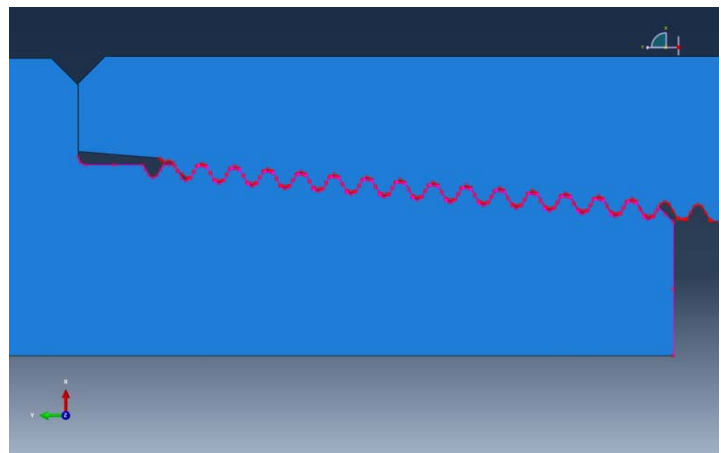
Interference of the threads on assembly using 9,167 ft-lb torque - resolved but no shoulder contact.
